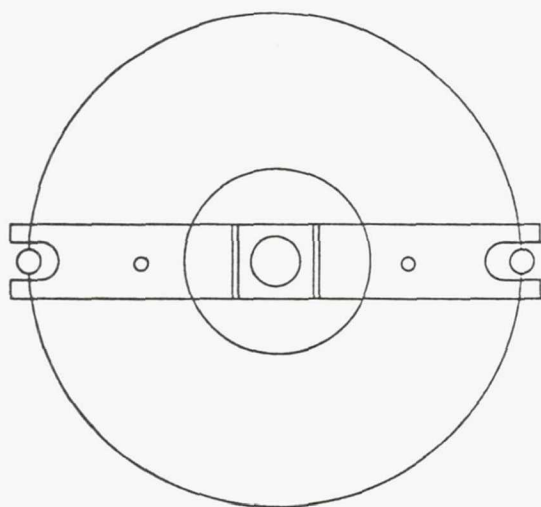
Cross-Section View of Rotating Drum without Nylon Rings
